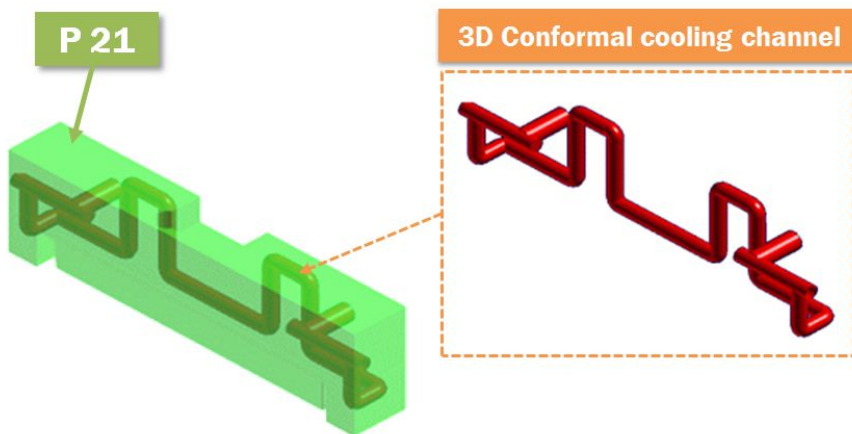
Final design of the multi-sliced mould core with 3D conformal cooling channel
